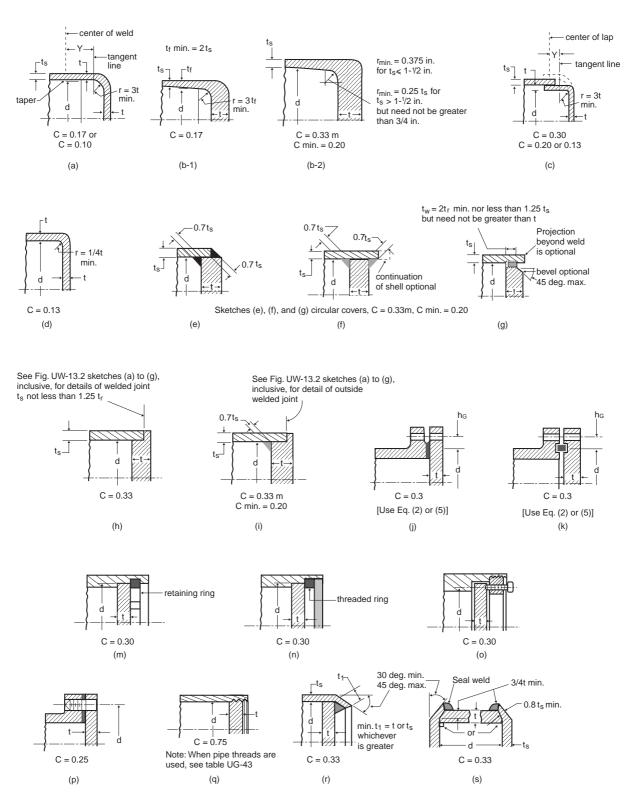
Some acceptable types of unstayed flat heads and covers. Fig. UG-34
